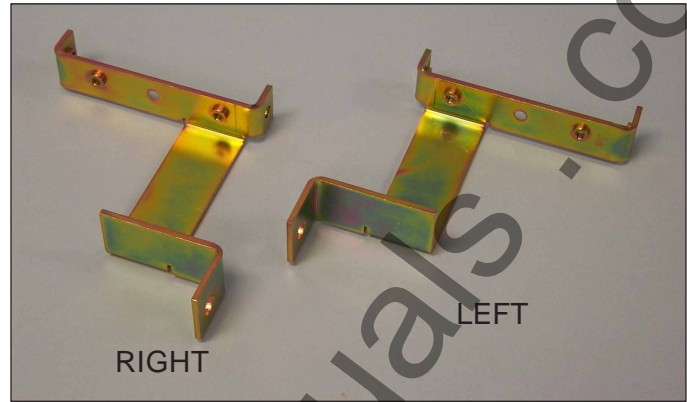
Identifying the Aux. CT Module Mounting Brackets.
